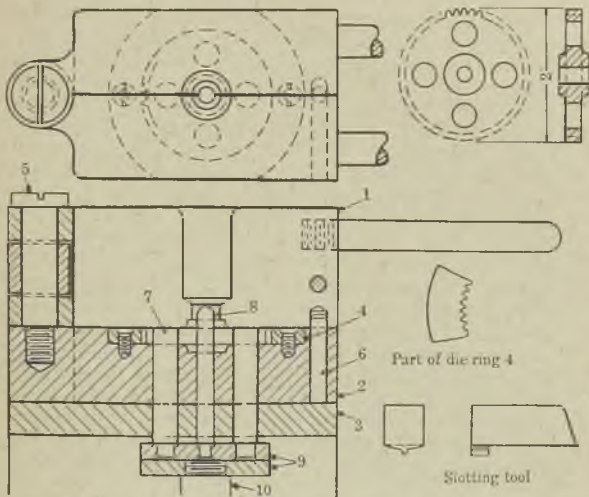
DETAIL DRAWING OF PERMANENT MOULD FOR CASTING SMALL GEAR WHEEL. (*The Metal Ind.*)
